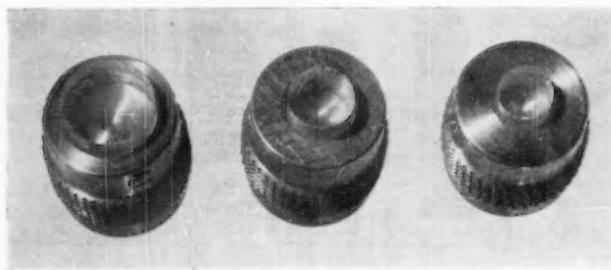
Specimen Clamps for Testing Plastic Cylinders.
